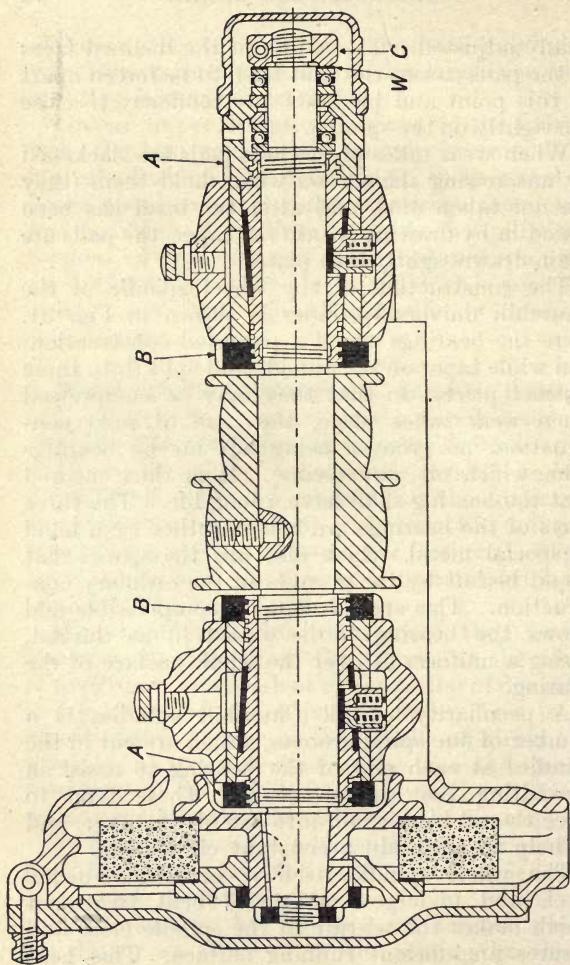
WHEEL HEAD OF CHURCHILL UNIVERSAL GRINDER
